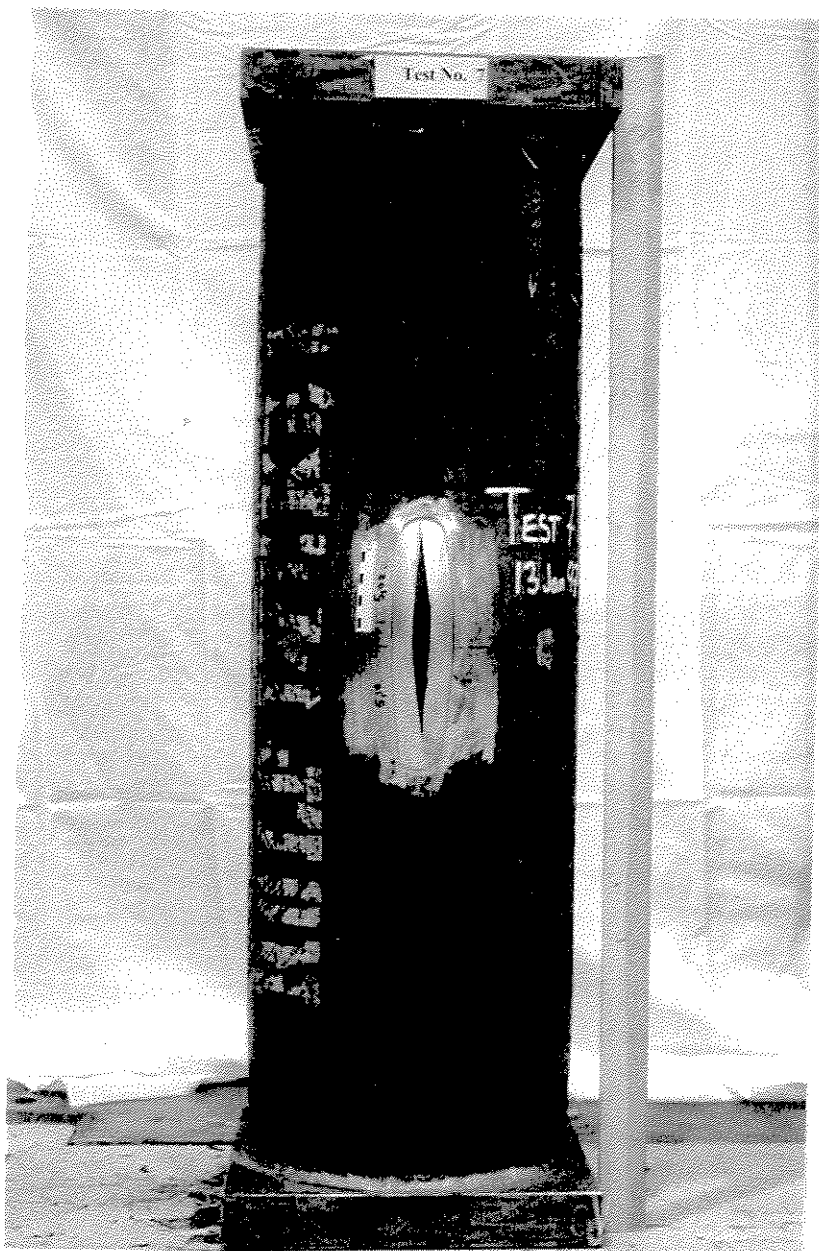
Picture of the test specimen no. 7 after the burst test
